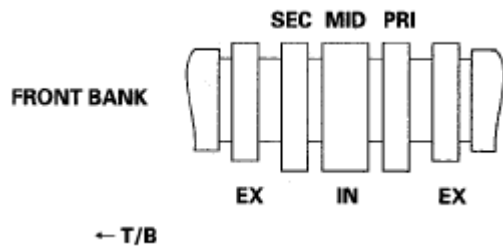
Identifying Cam Lobe Positions - Front Bank
